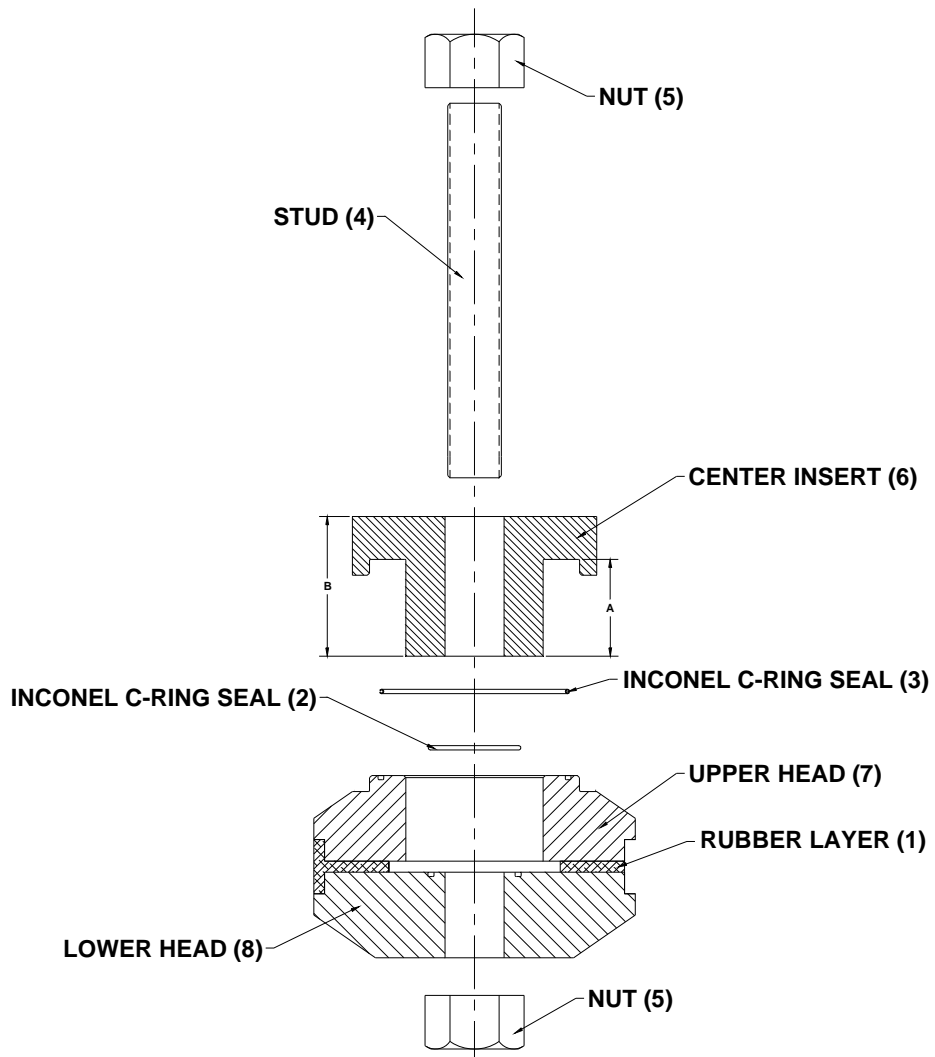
Exploded View of the Small-Scale Test Specimen
